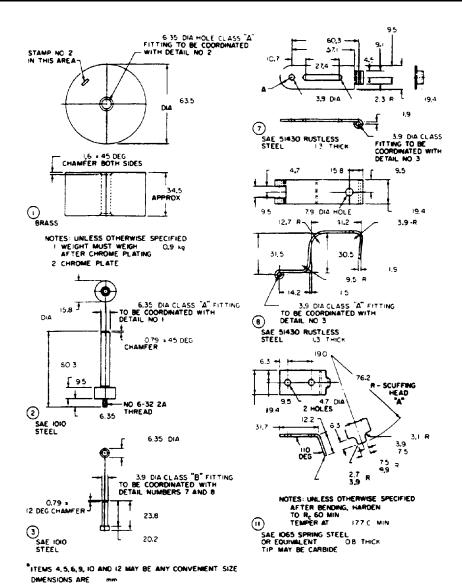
COMPONENTS OF SCUFFING ASSEMBLY
